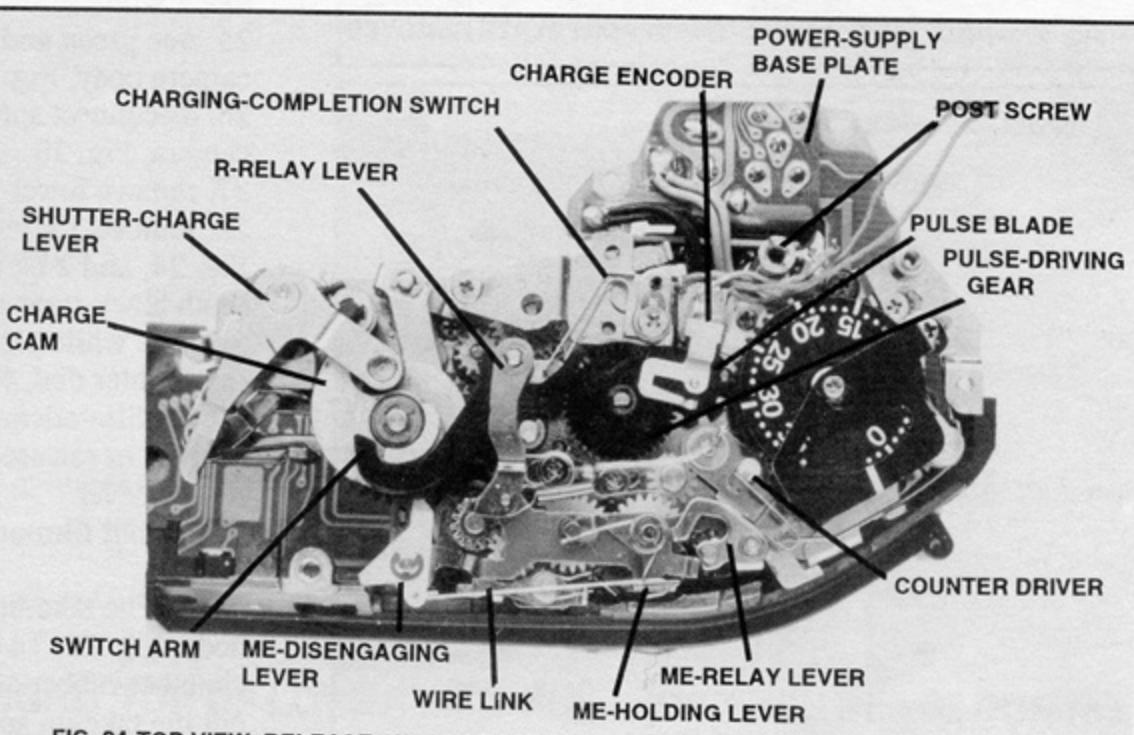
TOP VIEW, RELEASE-SWITCH BASE PLATE REMOVED
